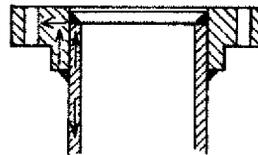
Paths of heat flow found in some typical pipe weld joints.
